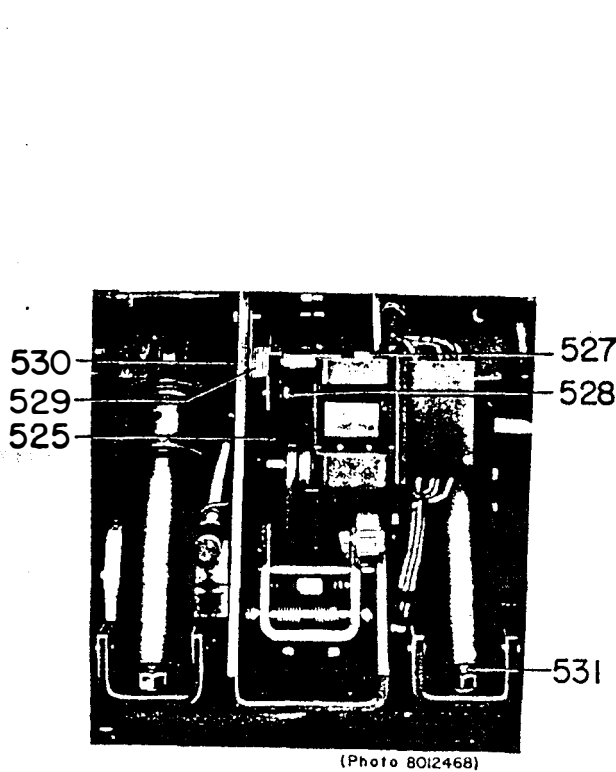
Left side view of types MS-13 mechanism for the types AM-4.16-0 and -1 breakers
